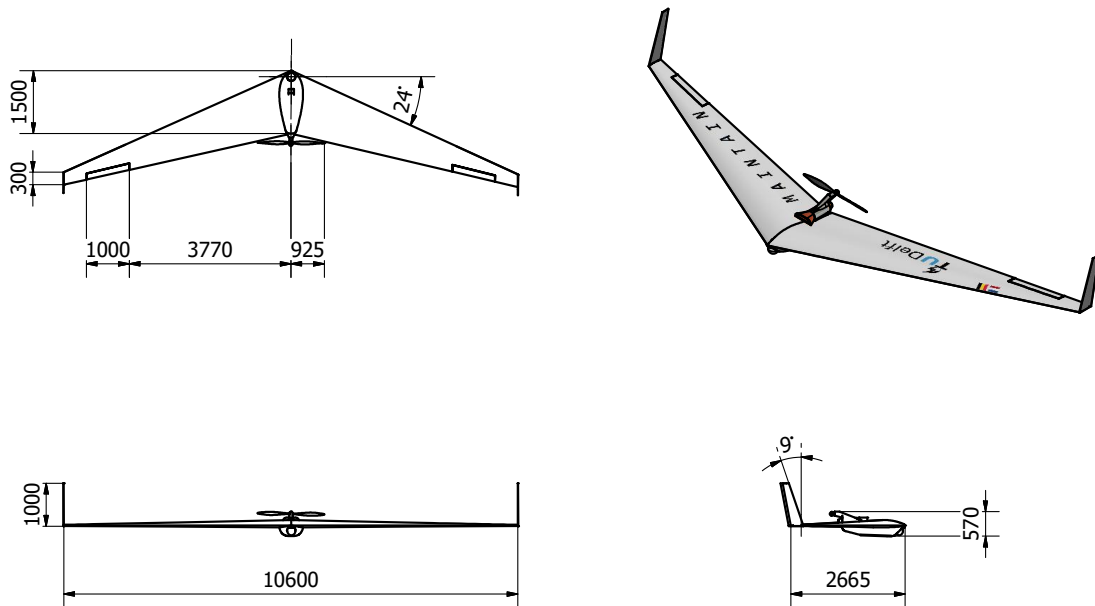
Three view drawing of the final design of the MAINTAIN UAV. Dimensions are in millimeters.
